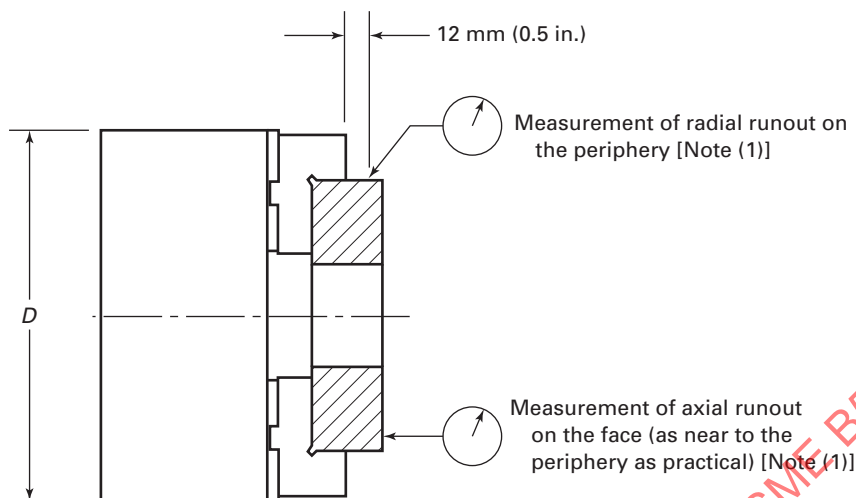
Manual-Scroll Chucks: Checking Centering Accuracy and Repeatability of Outside-Diameter GripLEGEND: D = nominal diameter of chuck L = minimum distance of indicator contact point from the jaw faceGENERAL NOTES:
